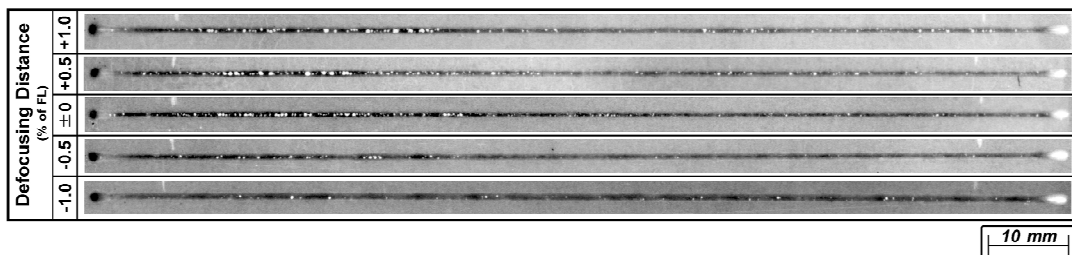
Radiographs of typical CO₂ laser melt-run welds.
